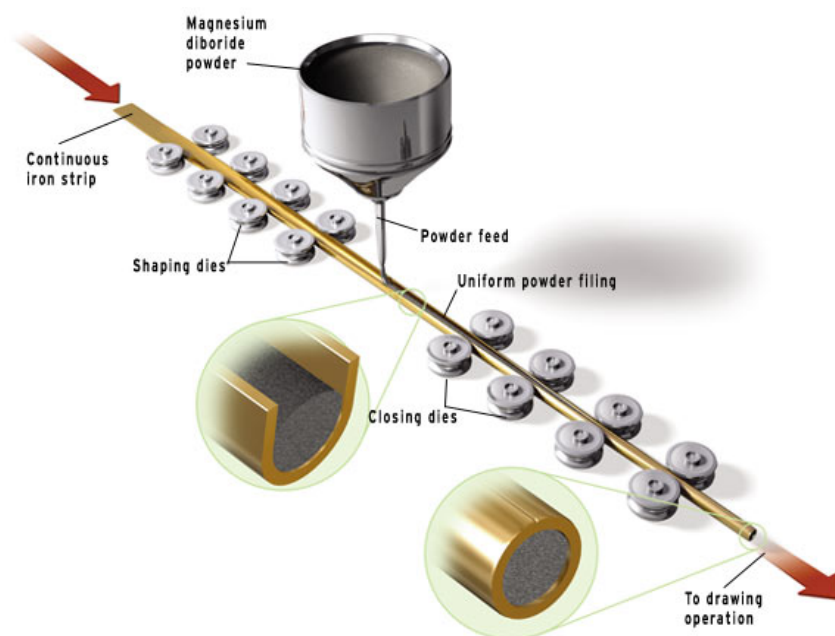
24: Schematic of apparatus for continuous tube forming and filling (CTFF) for MgB_2 wire and tape fabrication.
